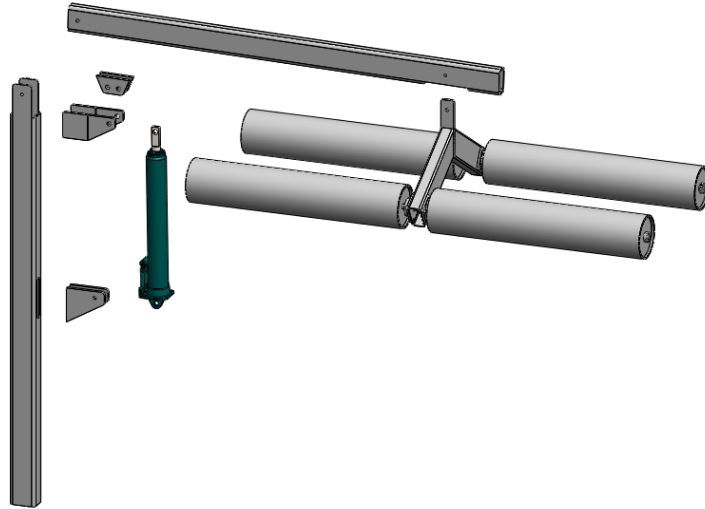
Exploded view of the supporting mechanism for the Top Roller Subassembly [11].
